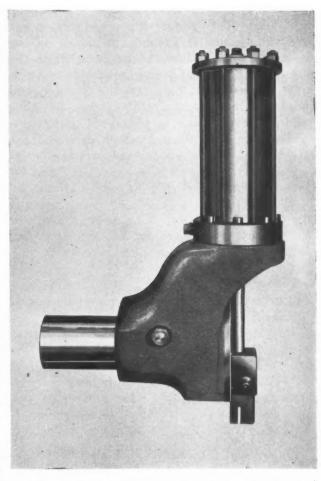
Special Reciprocating Head that can be Mounted on a Milling Machine for Cutting Internal Keyways and Grooves or for Other Shaping Operations
